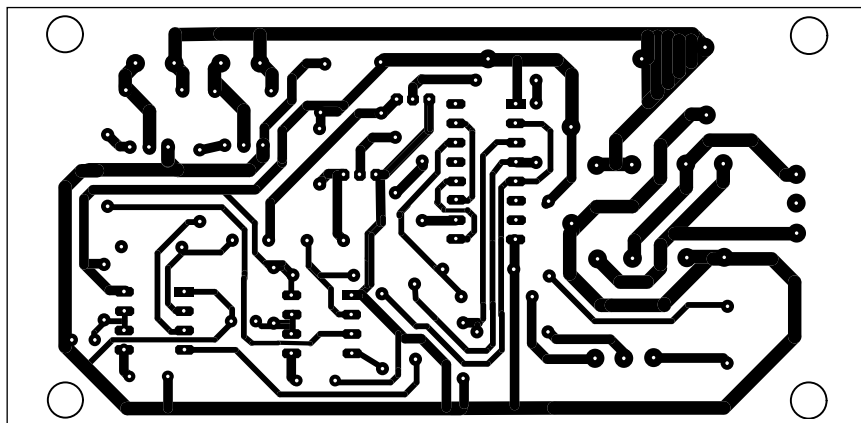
Actual-size, single-sided PCB layout for Fig. 2
